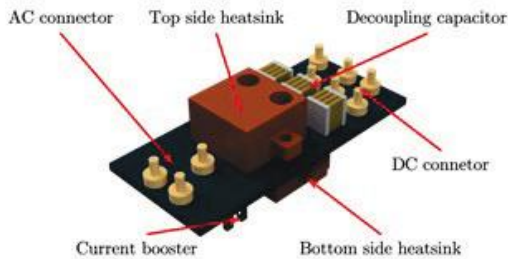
Single-phase single-die PCB embedded prototype.
